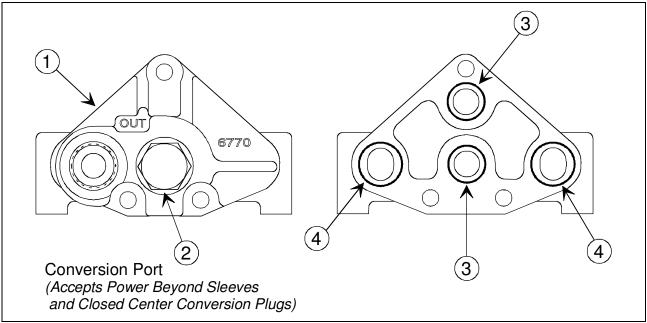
No. 6770 (Open Center) Outlet Cover Assembly
